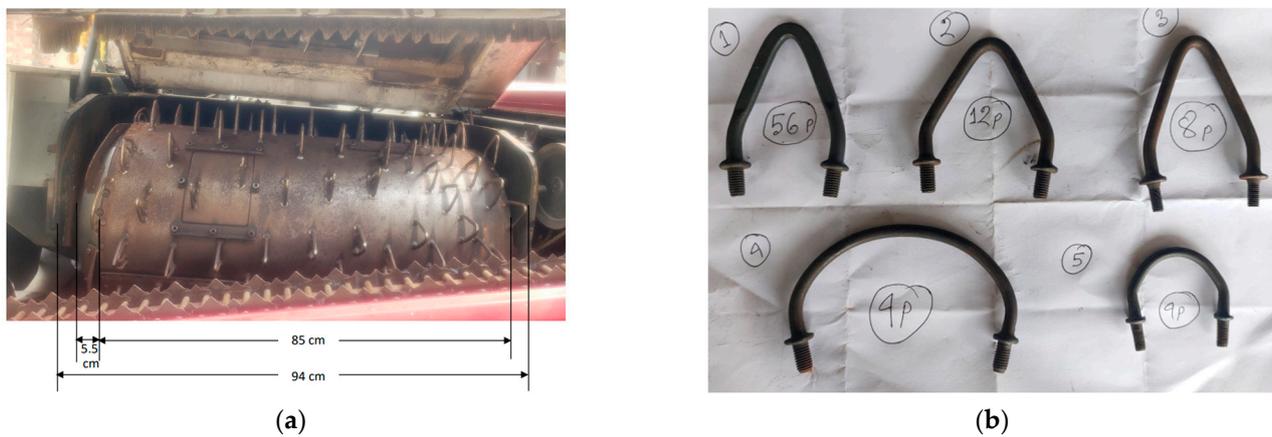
(a) Thresher teeth installed on a barrel of a Yanmar combine harvester with dimensions in centimeters. (b) Five different designs for threshing teeth.
